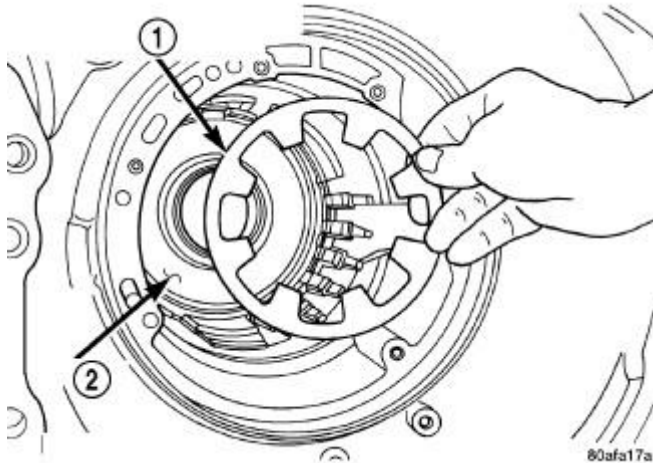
Remove/Install Low/Reverse Piston Return Spring
